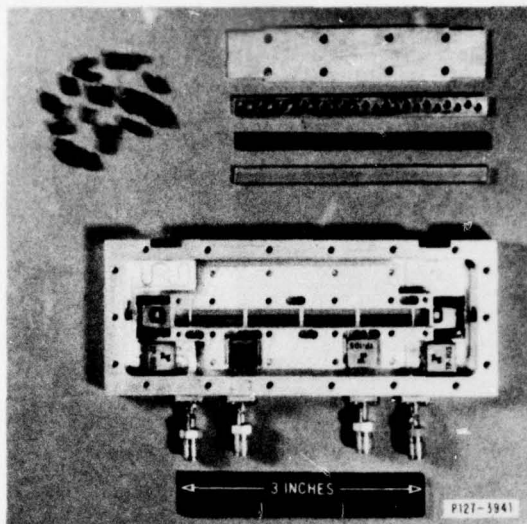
Complete convolver assembly with springs and mechanical components which maintain a stable LiNbO_3 -silicon air gap.
